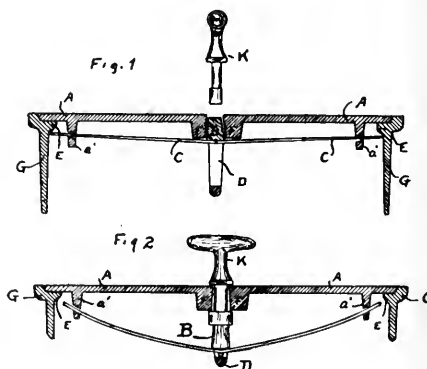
is a section view across the center of the box through the center of the opening for the key B. This view shows the top A locked in position by means of the spring C extending under the projecting lugs E, which are cast on the body of the box G. The top A is made of cast iron and has an opening B at the center, a boss F on the under side around this opening and two guide lugs a' on opposite sides of the boss F and a Guard D to protect the spring C which passes
